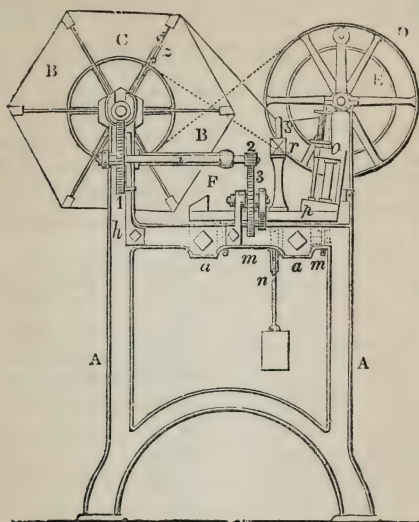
Automatic Reel, for winding and counting hanks. End View
